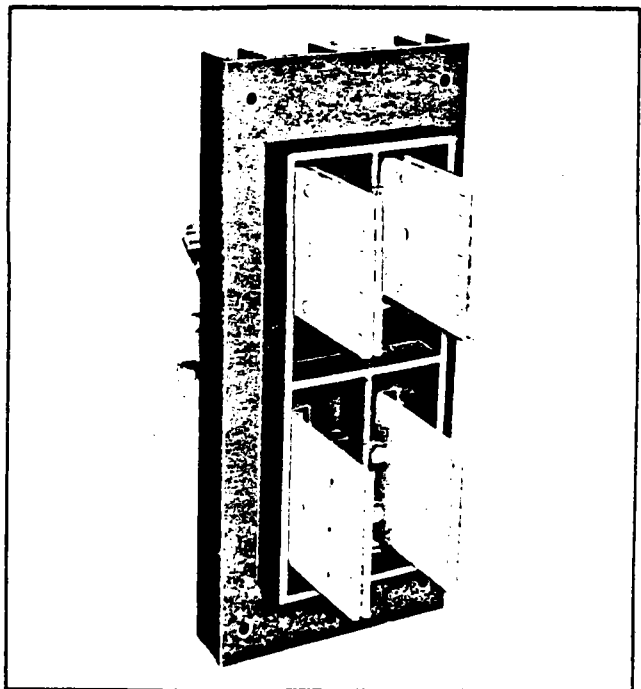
Type DS-840 Pole Unit Assembly - Rear View (391097)
